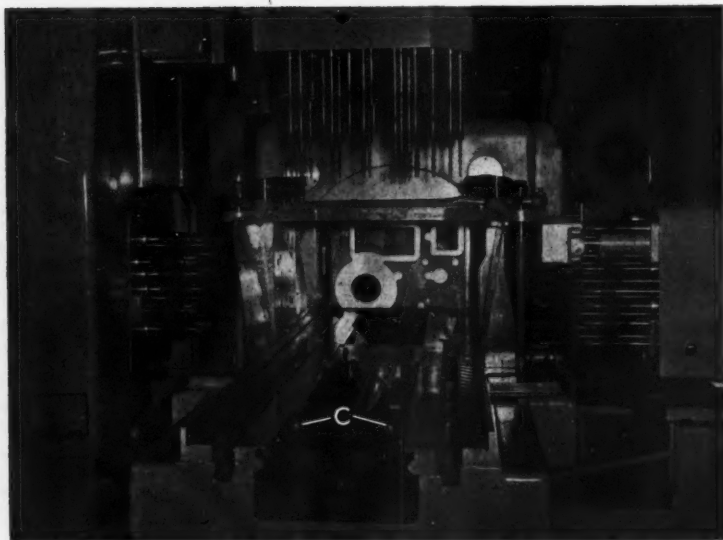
View of the loading position and the first machining station of the machine in Fig. 7, showing the hydraulically-operated double transfer carriage whereby the casting is moved to the drilling position and then to the turn-over unit
